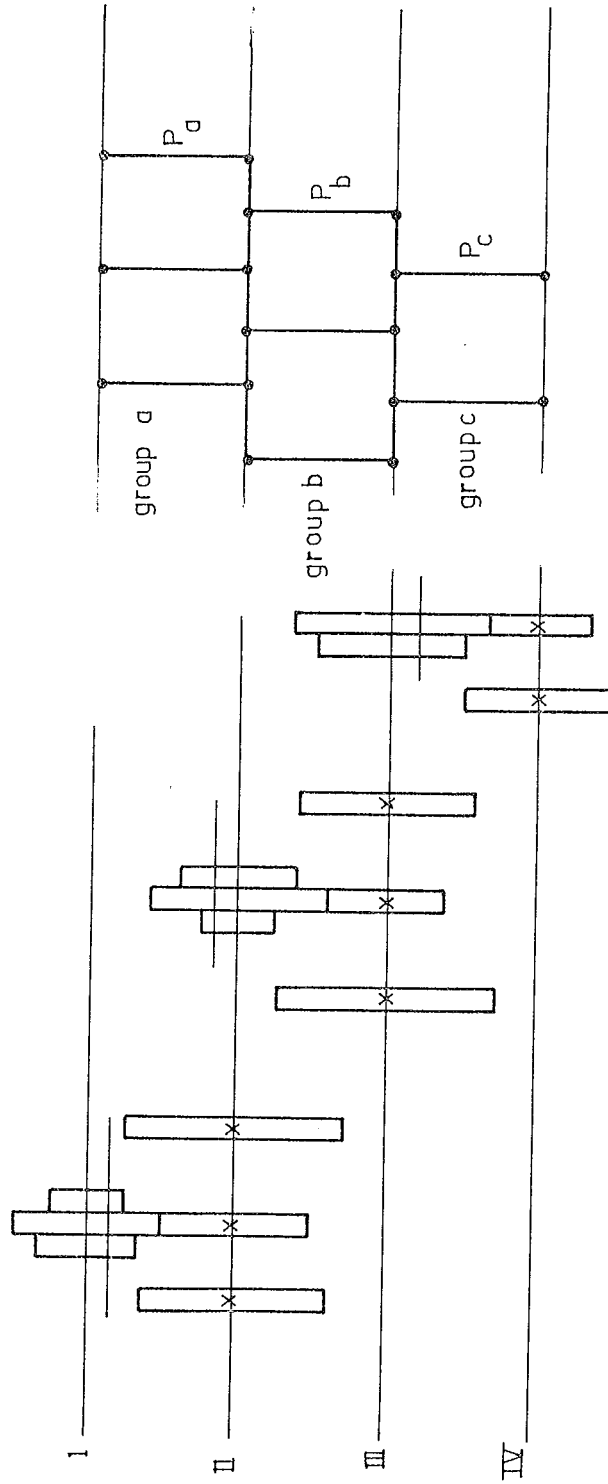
Arrangement of Gears of an 18 Speed 4 Shaft Gearbox
